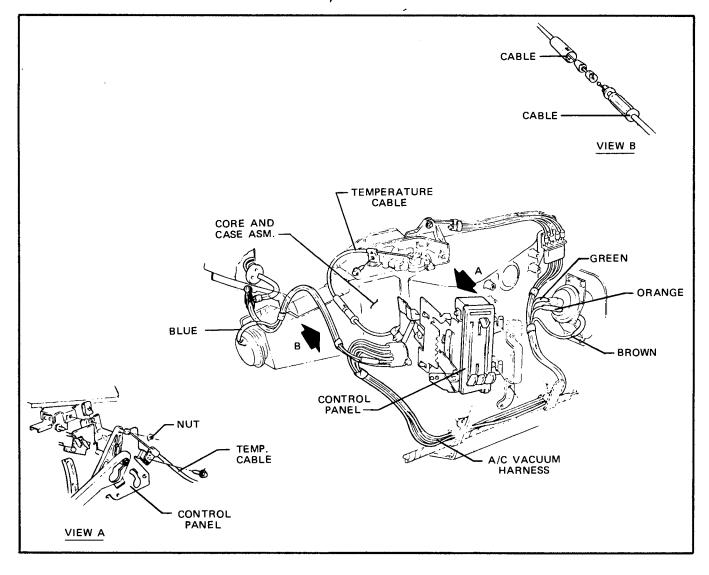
A-124 G Series Control Cable and Vacuum Harness Routing
